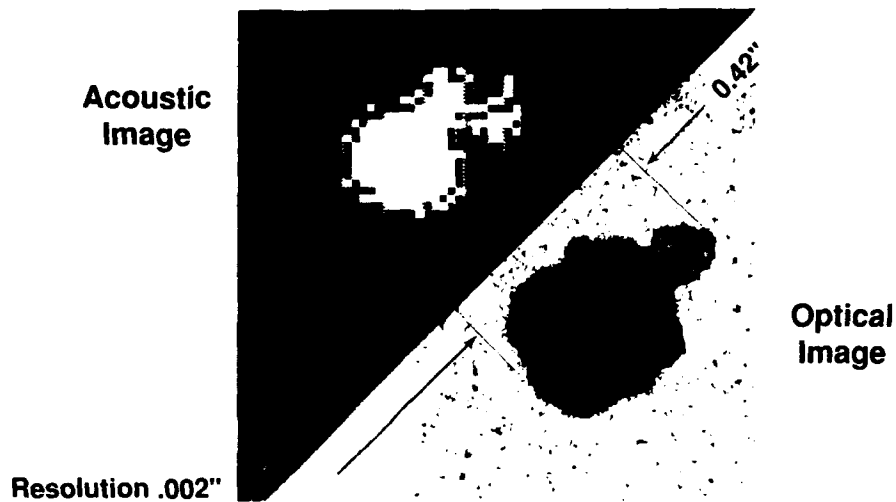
Detail of spalling on top of cylinder #2, 10° to 50° location.
